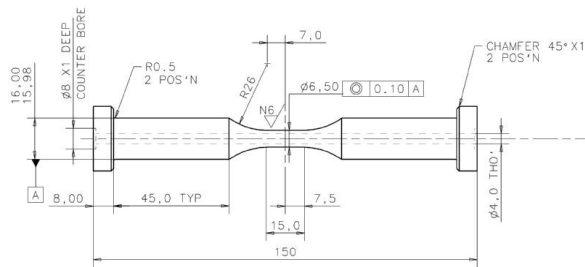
Geometry and dimensions of a TMF specimen used by Saad (2012)
